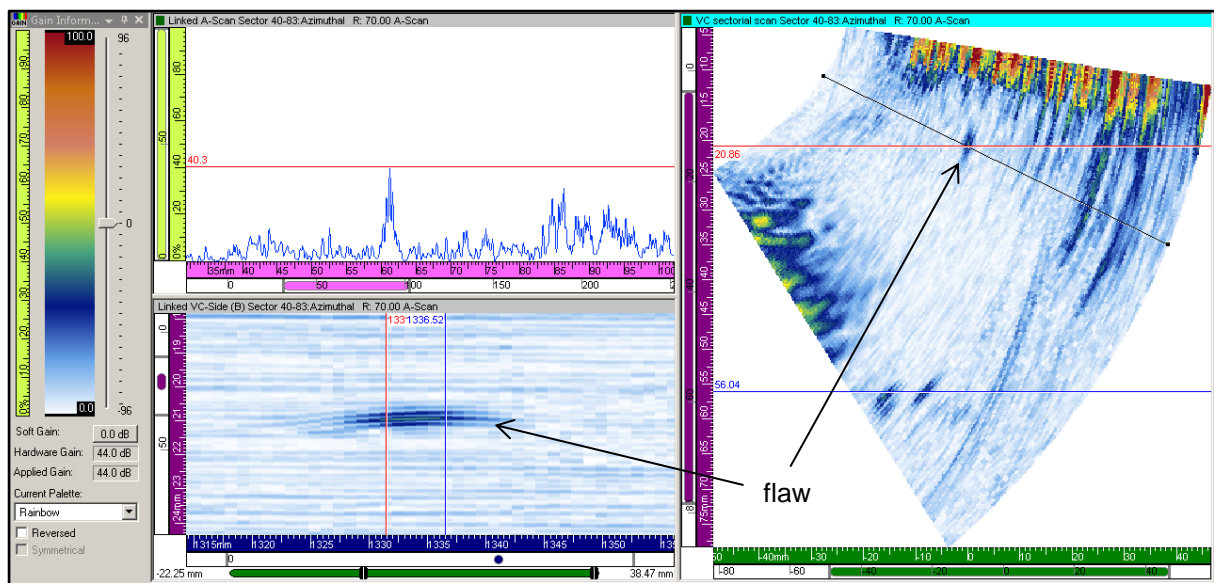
Indication of a flaw in a butt fusion weld at Plasflow.
